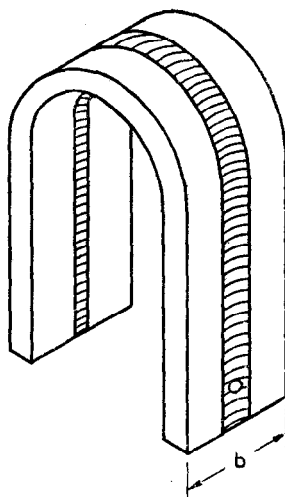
LONGITUDINAL BEND TEST SPECIMEN AFTER BENDING
